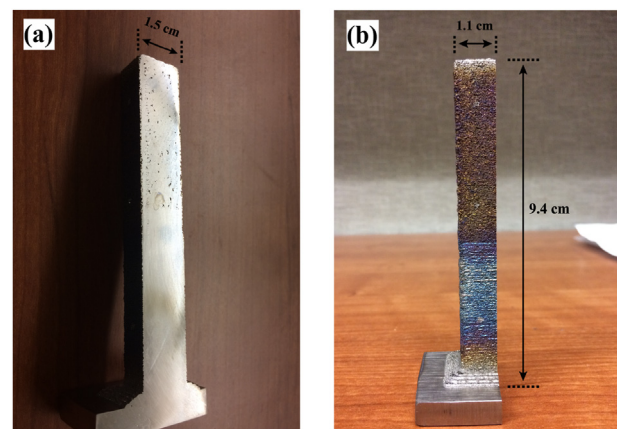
Shape of the LPDED Ti–6Al–4V specimen showing (a) polished and (b) as deposited surfaces. The images show the billet after being cross-sectionally polished.
